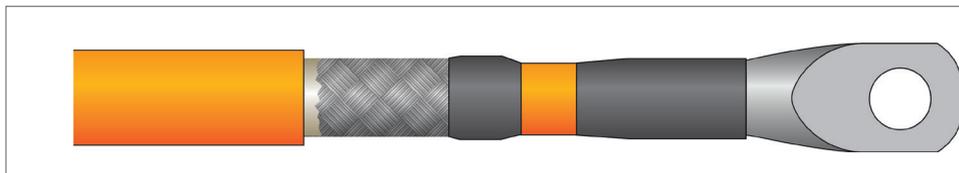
Step 8: Placing and fixing the shrink sleeve
